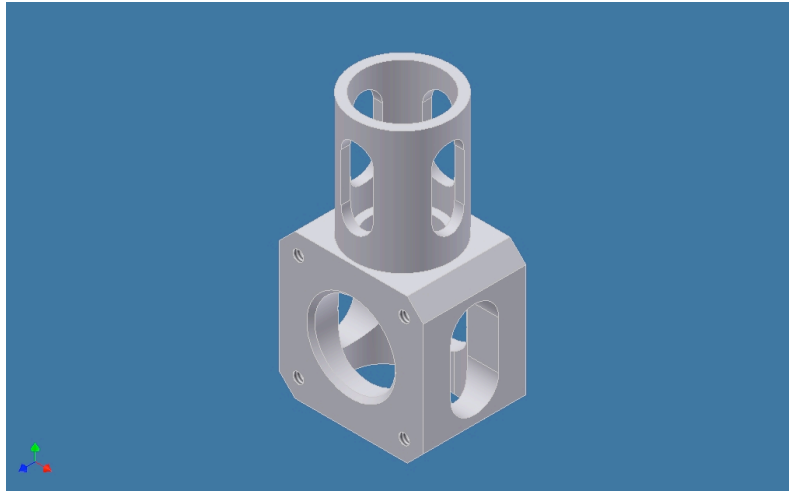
The ankle base on the Cornell Ranger. It supports two bearings to hold the ankle shaft and various holes to reduce weight.
